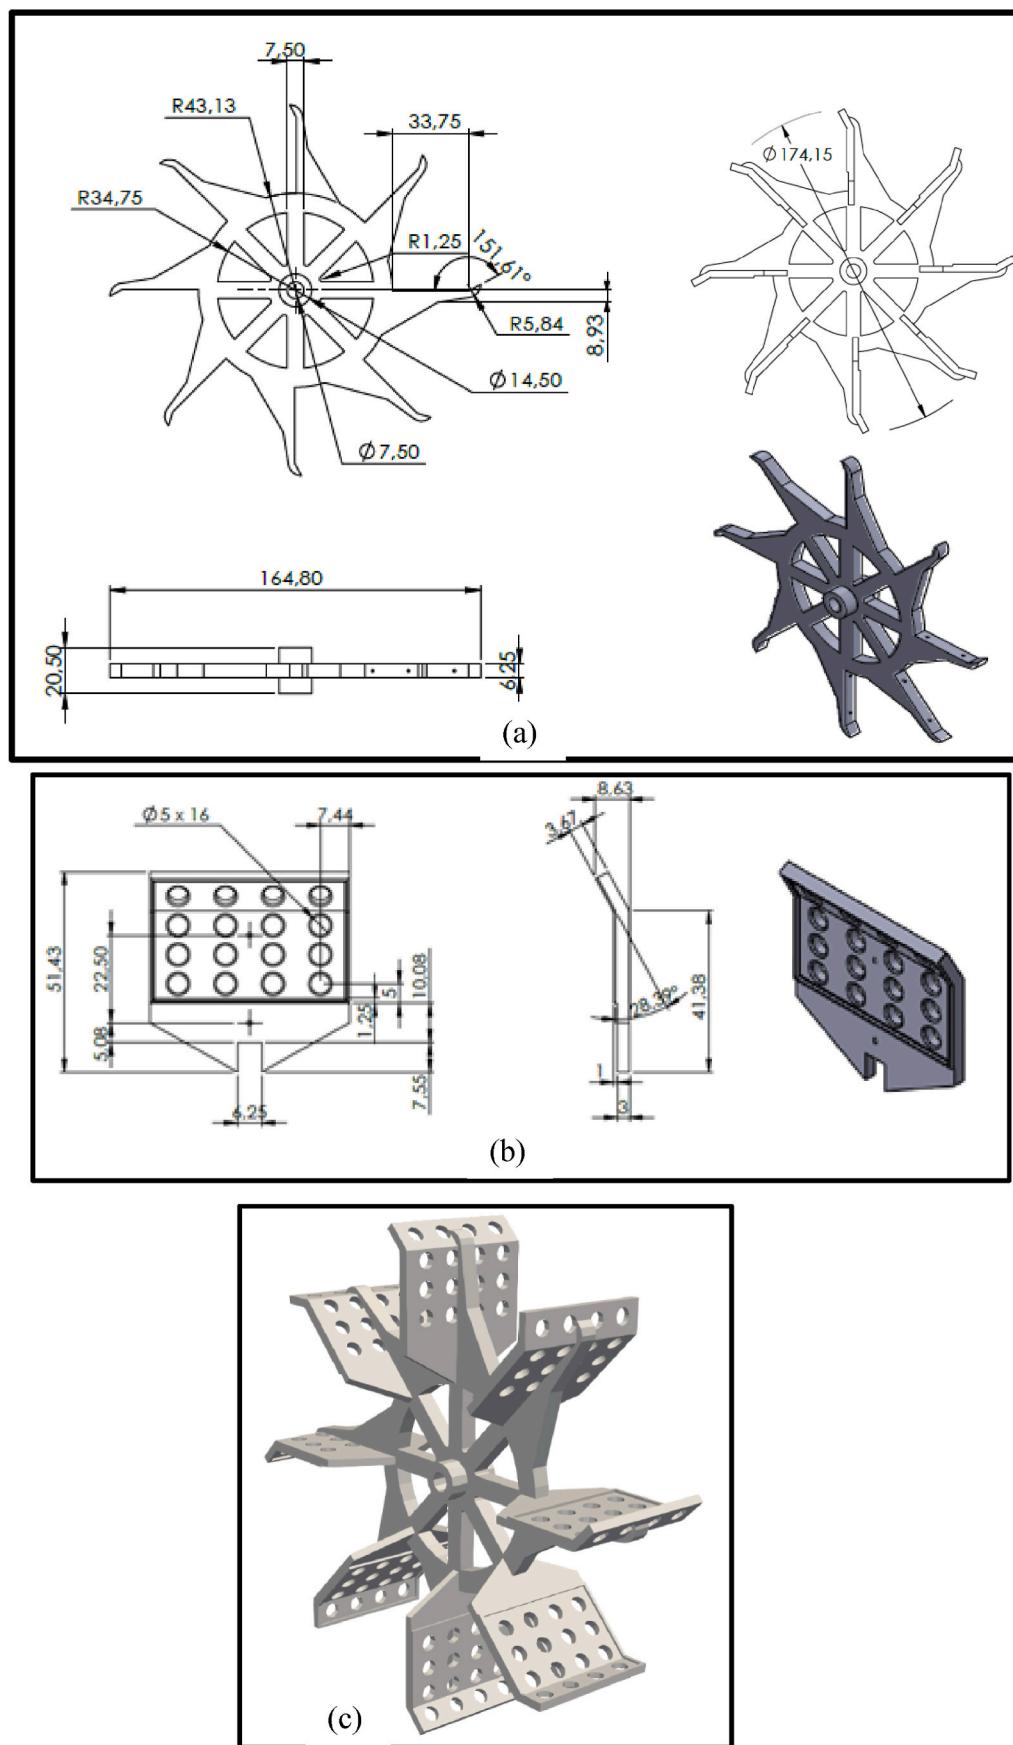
An example of the design drawing of aerator 8-blades and 16-holes per blade: (a) aerator frame and wheel; (b) blades; (c) complete drawing.
